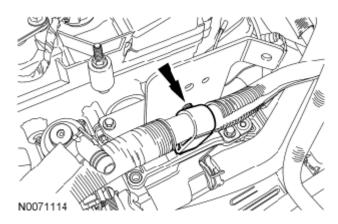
Locating Brake Booster Vacuum Hose Retainer Courtesy of FORD MOTOR CO.
